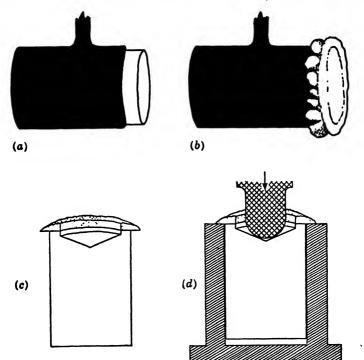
Diagram of specimens used in Ollard test for measuring adhesion of plated coatings.
